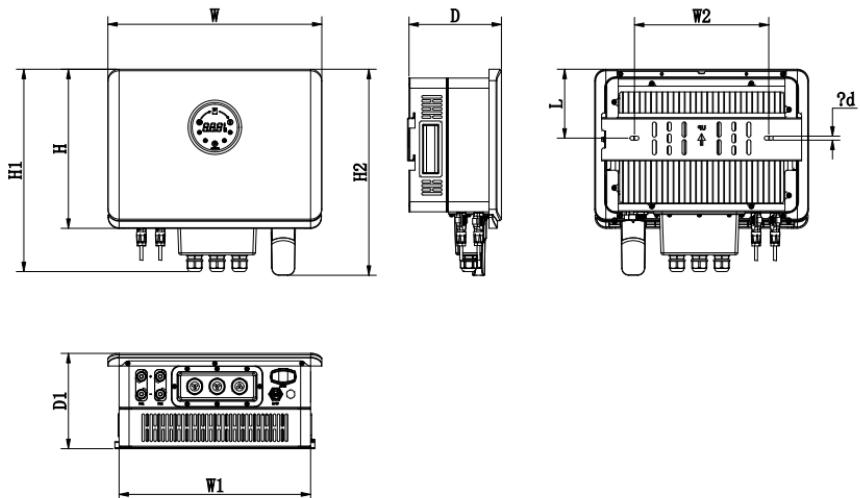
2.2 kW-11 kW Outline Dimension
